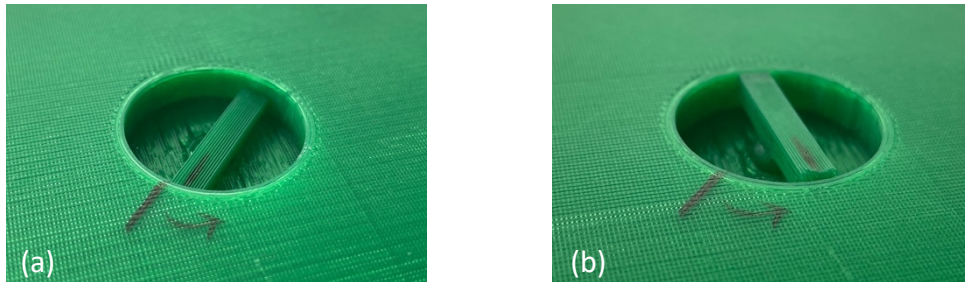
Images of Handle on 3d Printed Model (a) shows handle down and off axis, (b) shows correction
